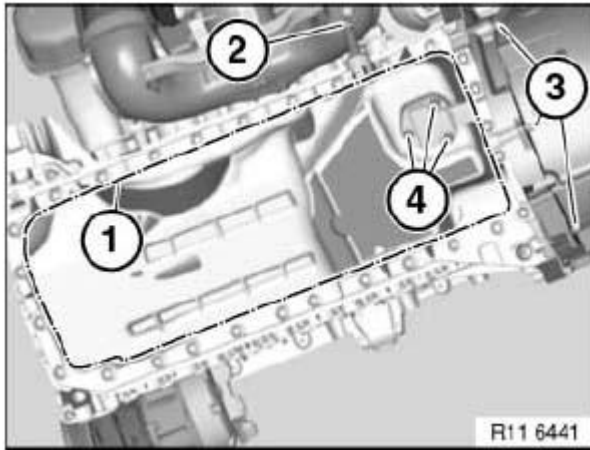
Identifying Oil Level Sensor, Return Hose, Retaining Screws And Bolts
